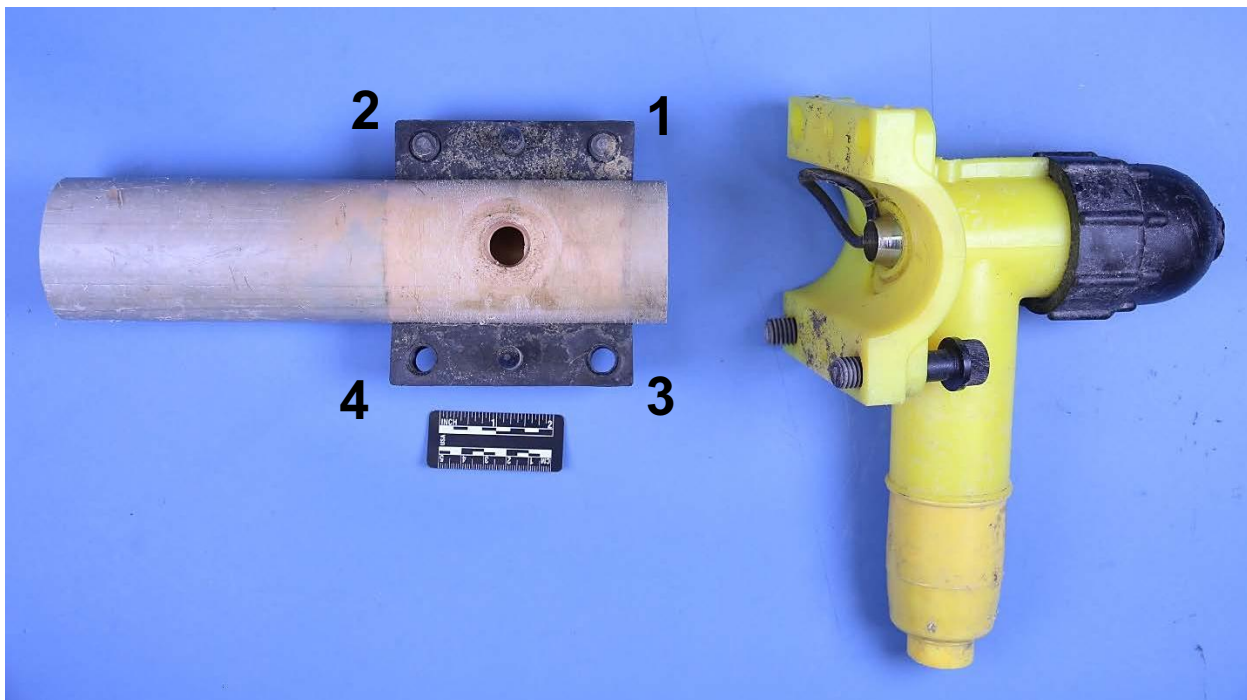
Photograph of the disassembled tee assembly showing the exposed outer top surface of the main and pierced hole (after removal of the tower portion). The top portion of the main contained scratches that for the most part were circumferentially oriented relative to the length of the main and intersected the pierced hole in the main.
